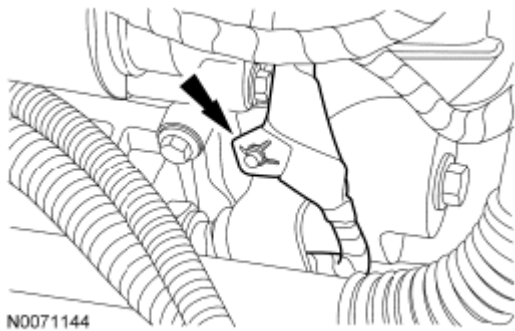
Locating Starter Wire Harness Retainer Of Starter Motor Stud Bolt
